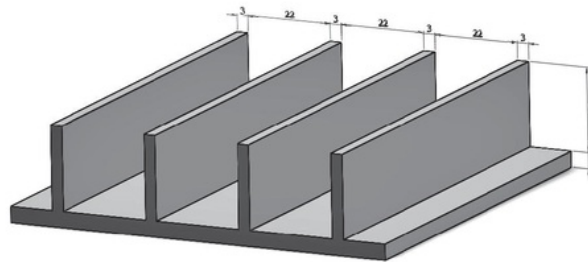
Geometry and dimension (mm) of the workpiece thin walled Ti₆Al₄V
